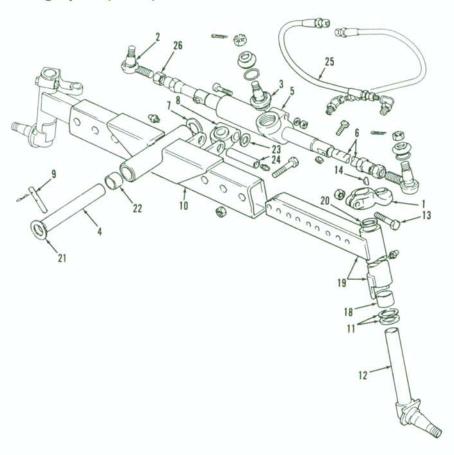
Exploded view of front axle typical of type used on two-wheel-drive 399 models.
